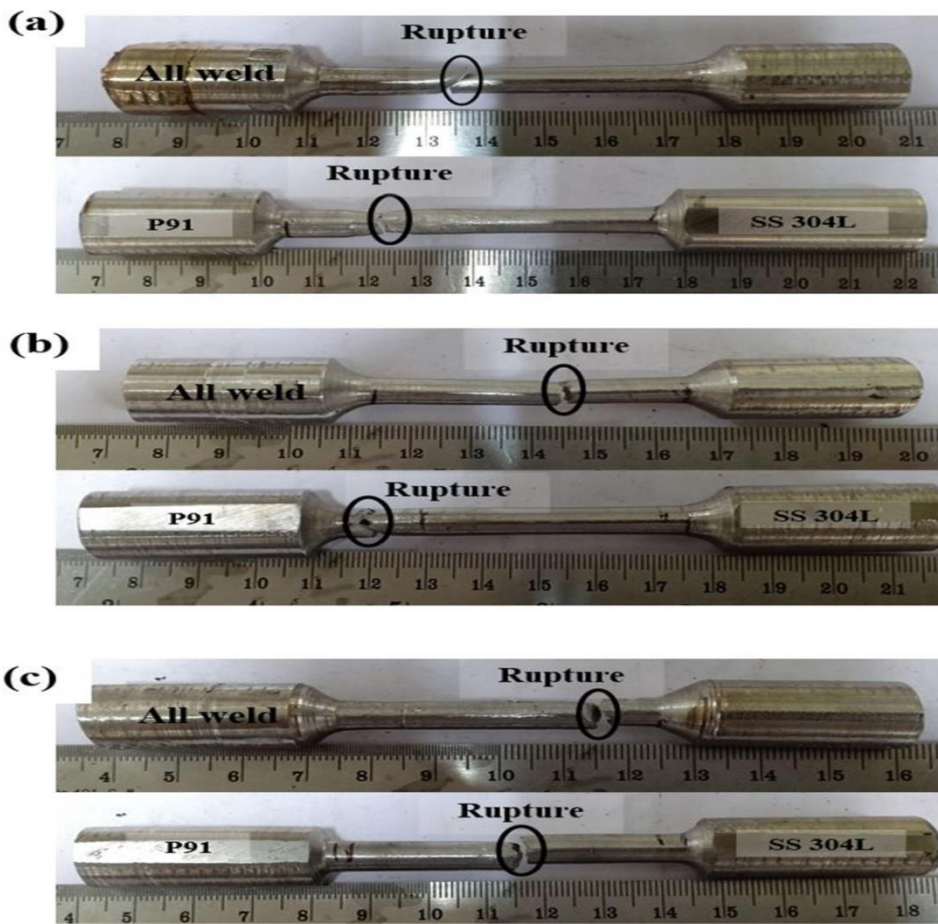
Fractured weld tensile test specimen (Transverse and All weld) fabricated using a) Electrode E7M b) Electrode E16M c) Commercial electrode
